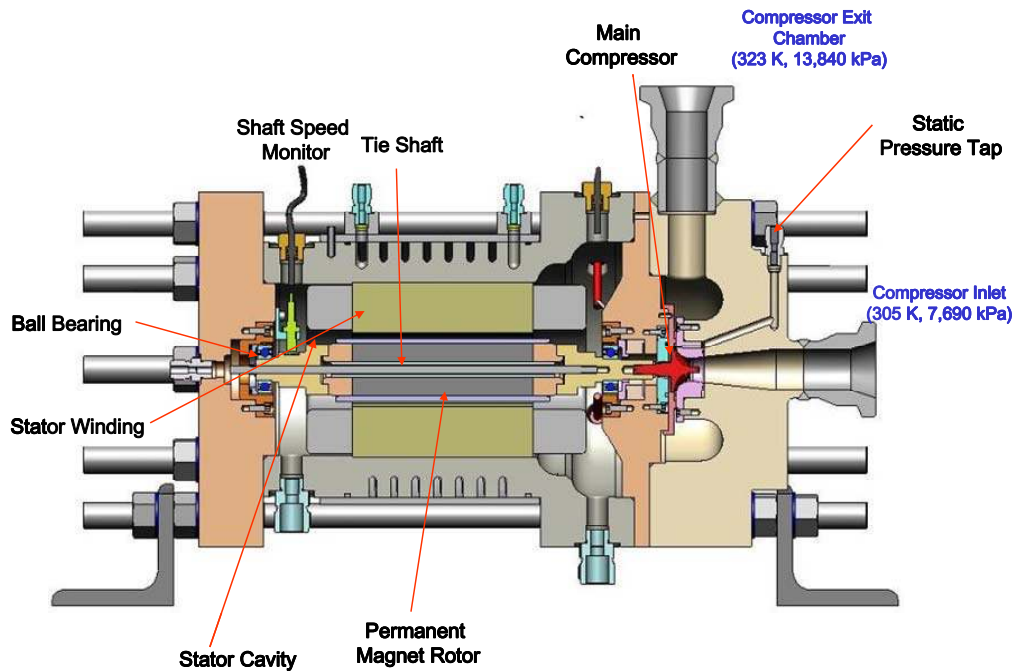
Schematic drawing of the motor-driven S- CO₂ compressor. This configuration uses ball bearings and has no turbine.
